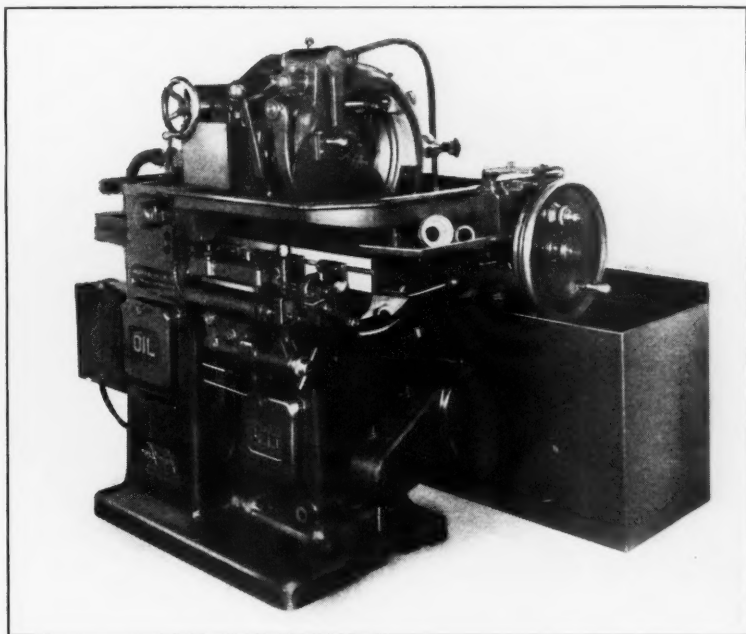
"Hydro-Matic" Internal Grinding Machine with Non-traversing Wheel
